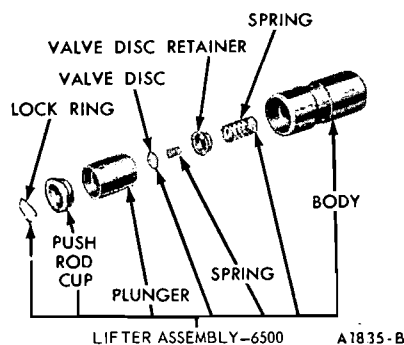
Typical Hydraulic Valve Lifter Assembly
